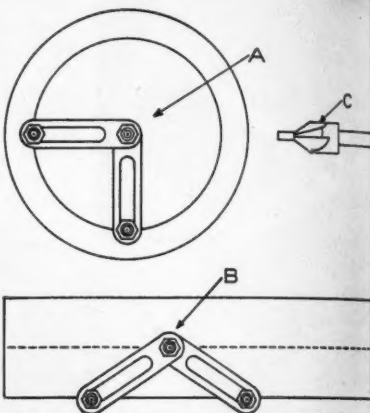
Application of Tool for Drilling Holes on a Circle or in Line with Edge of Workpiece.
